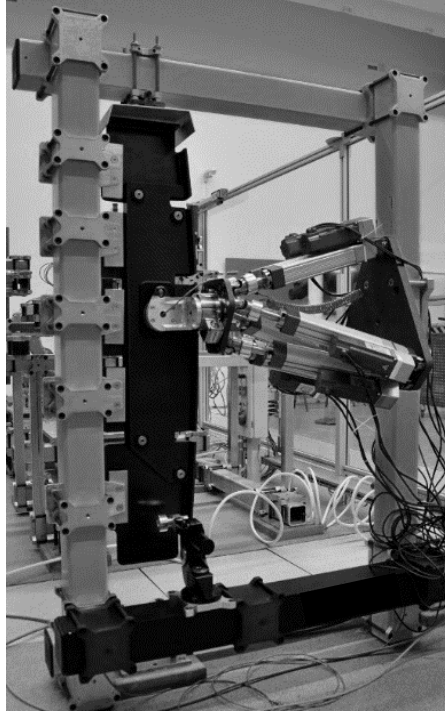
Hexapod demonstrator conducting force-feedback assembly.
